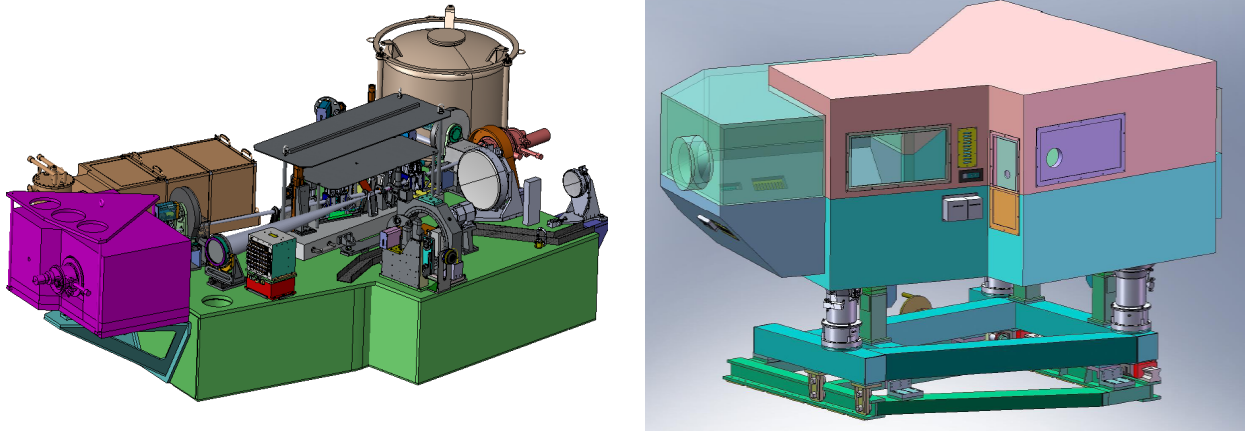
The view on the left shows the complete SPHERE opto-mechanical assembly. The view on the right shows how SPHERE will look like in operation, when the opto-mechanical assembly is mounted onto the vibration damping system and into the thermal-vacuum enclosure.
